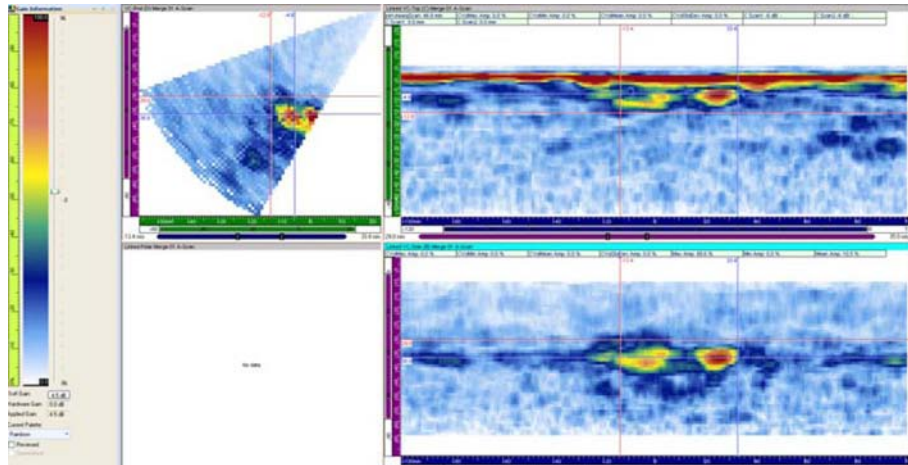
Specimen 9C-034 Flaw 2 After Weld Crown Removal at 2 MHz
